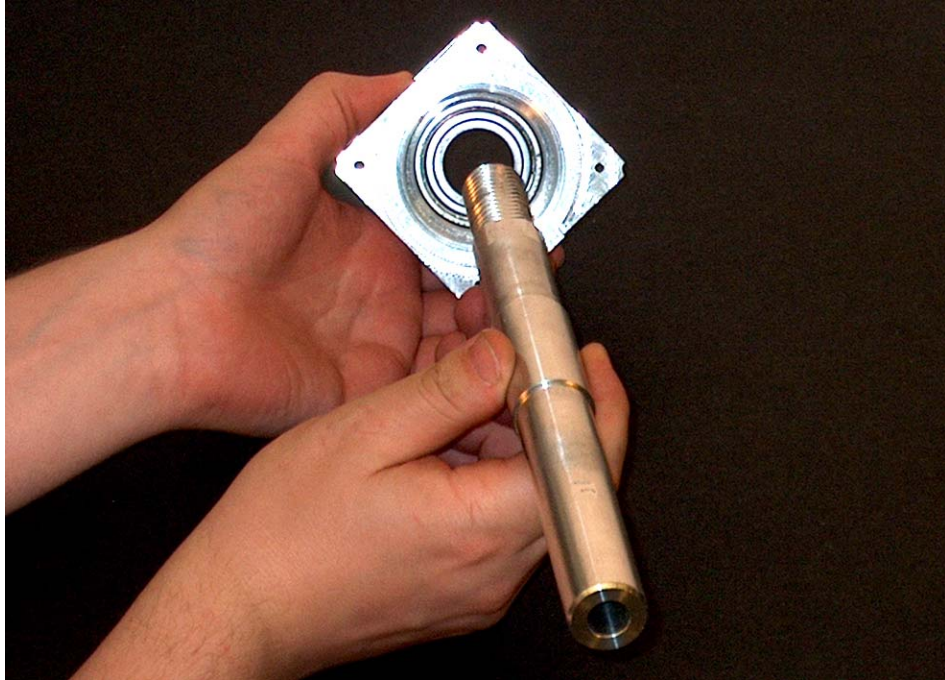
Insert Yaw Shaft in Upper Bearing Housing
